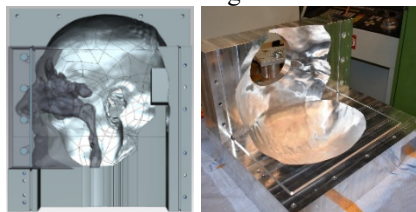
Sketch of mold with inner respiratory tract (left). Parts of manufactured mold (right).
